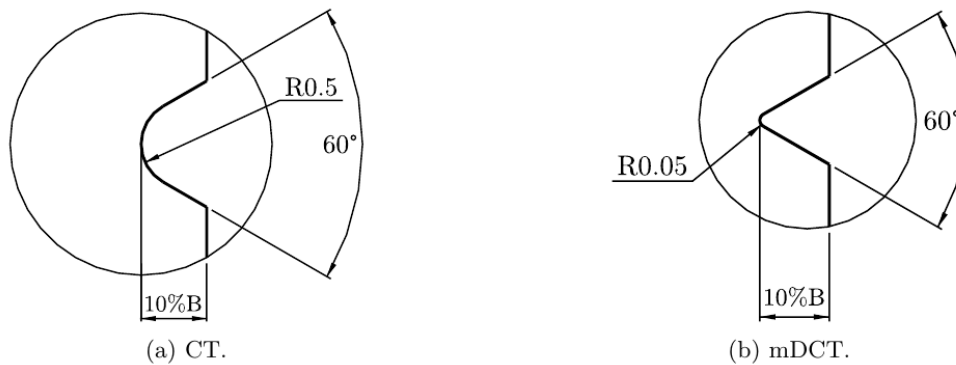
Side-groove dimensions for both macro and sub-size specimens.
